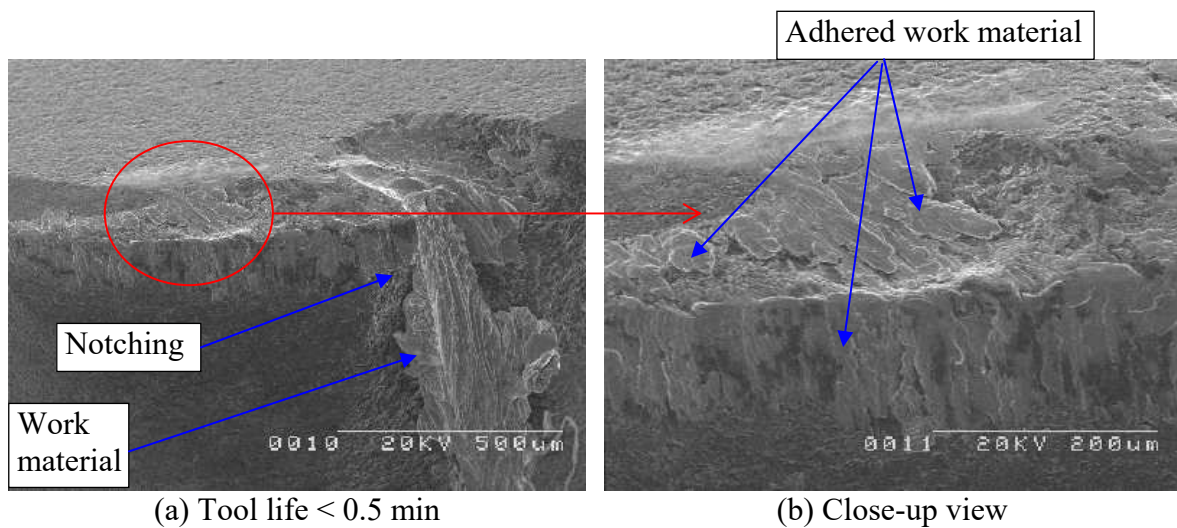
(a) Worn PCBN 300 (T8) insert after machining Ti-6Al-4V alloy with 11 MPa coolant pressure at a speed of 150 m min^{-1} and (b) enlarged section of worn surface.
